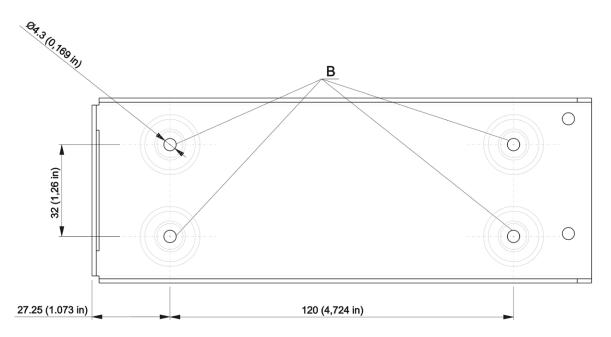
MK6201-(010) mounting slot fixing holes, dimensions in mm and (inches)
